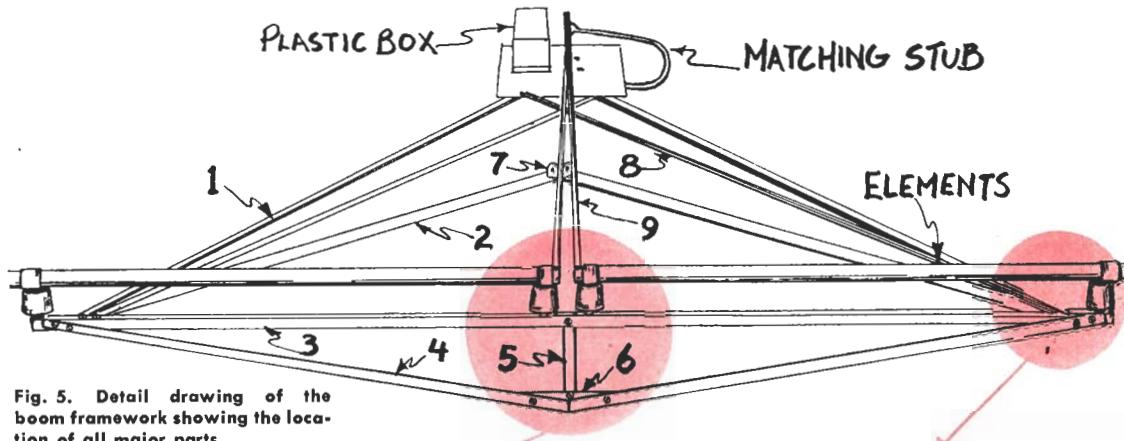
Detail drawing of the boom framework showing the location of all major parts.
